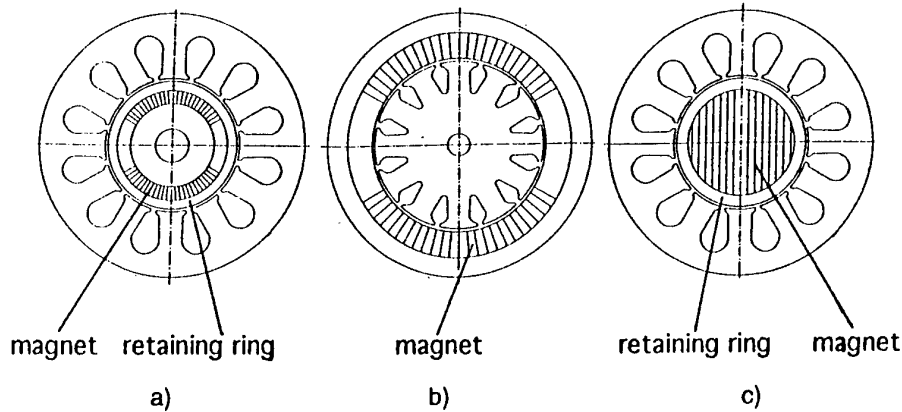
Different kinds of permanent magnet machine constructions. a) Internal rotor - peripheral magnets, b) external rotor - peripheral magnets, c) internal rotor - cylindrical magnet.
